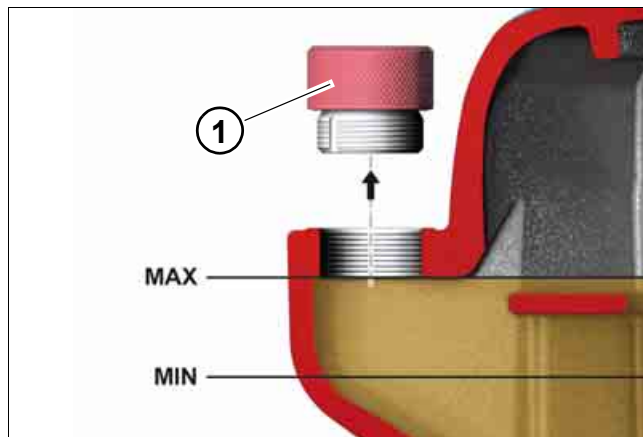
Oil level check via oil filler opening (sample depiction)
